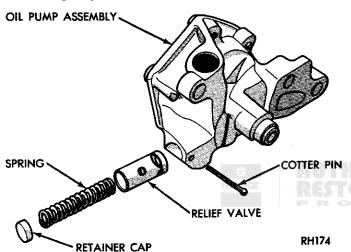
Oil Pressure Relief Valve (Disassembled)
